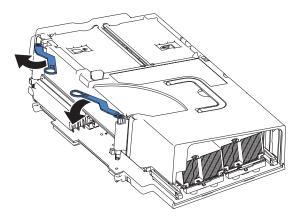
Fully extending the locking levers to remove the SMP Expansion Module cover
